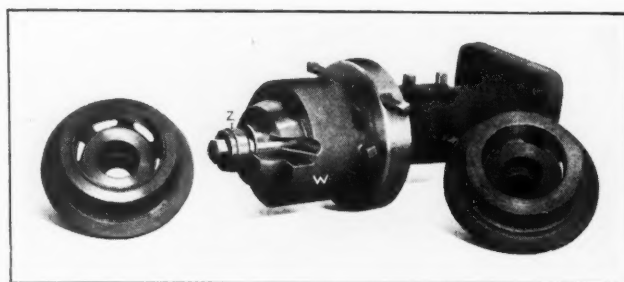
(Center View) Spiral Type of Form Cutter; (Left-hand View) Finished Housing; (Right-hand View) Rough Casting
